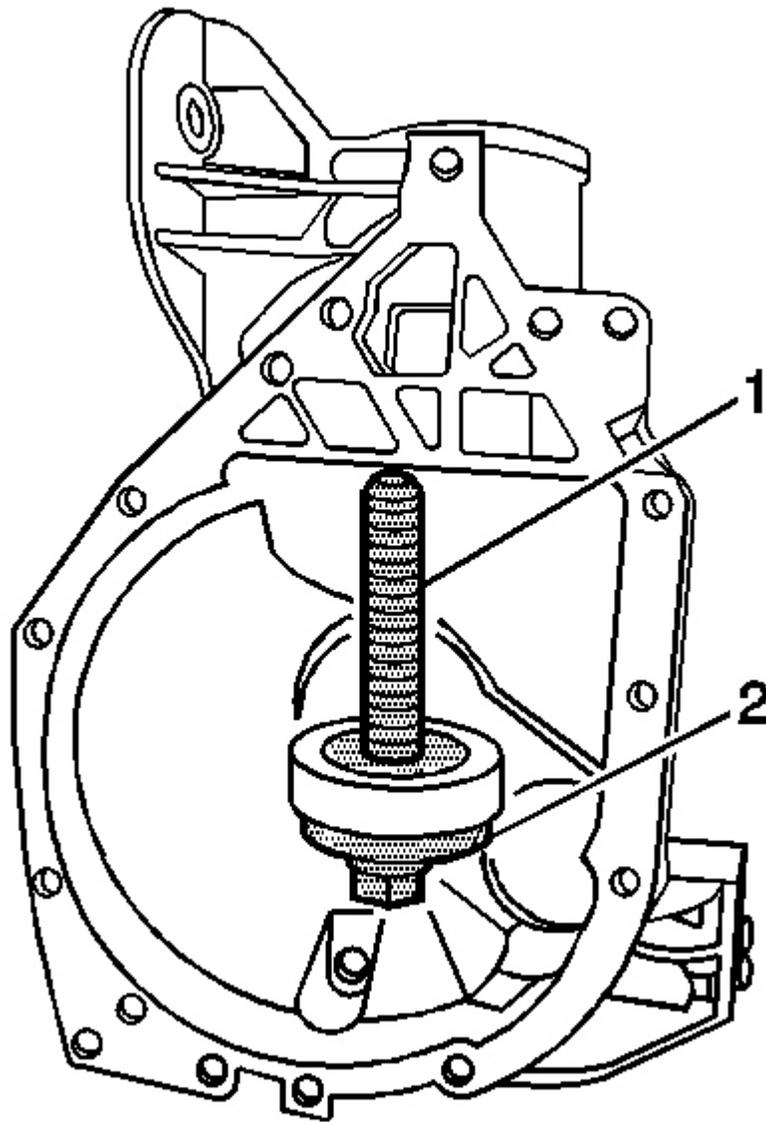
Installing Inner Pinion Bearing Cup Onto J 45754-2 & Forcing Screw
